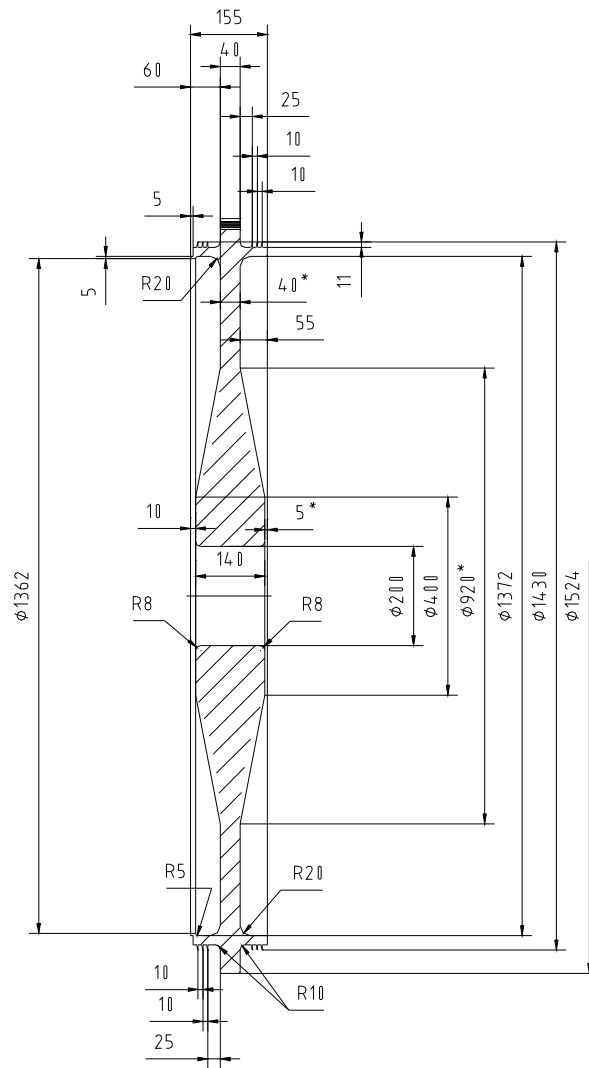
Sketch of welded turbine rotor disk [Alek 02]
